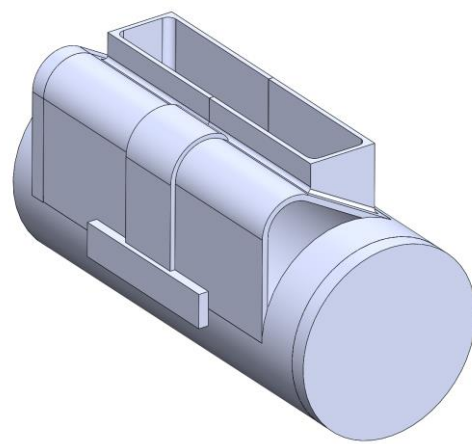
Main housing assembly back. The opening for the pin mill axle is shown at the end of the pin mill housing, above the cylinder.
